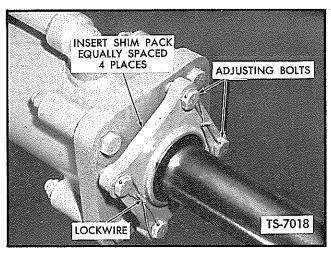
Adjust Packing Gland (Steering Cylinder Shown)
